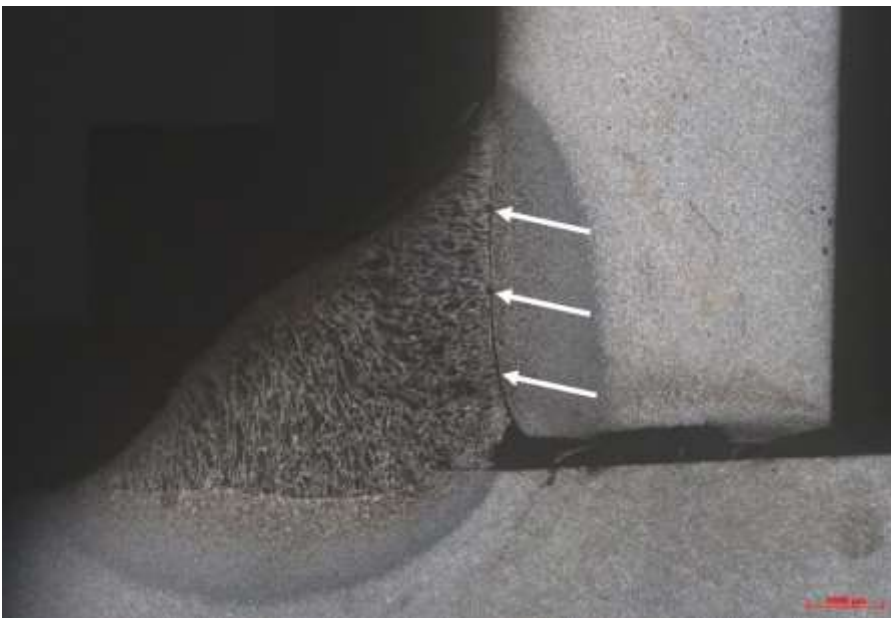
Photo above shows lack of fusion along the vertical edge of a MIG weld which will lead to a clean separation between the part and the fillet when tested to failure.
